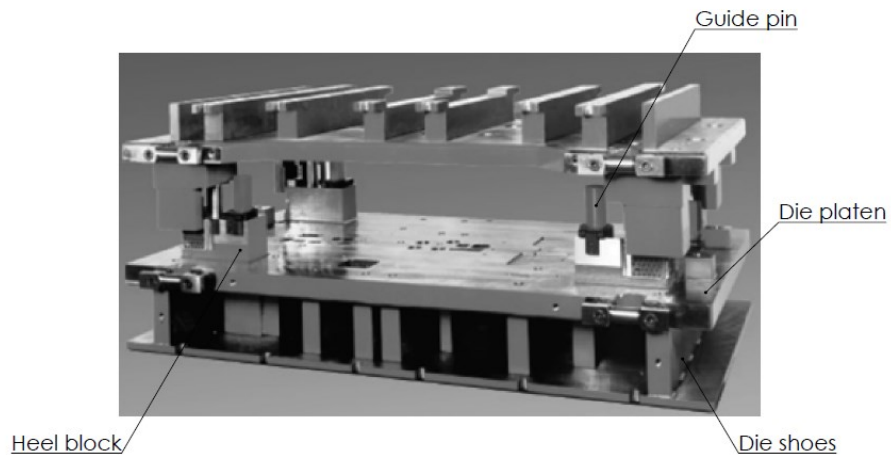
Anchor Danly die set. Forming tool not shown [28]
